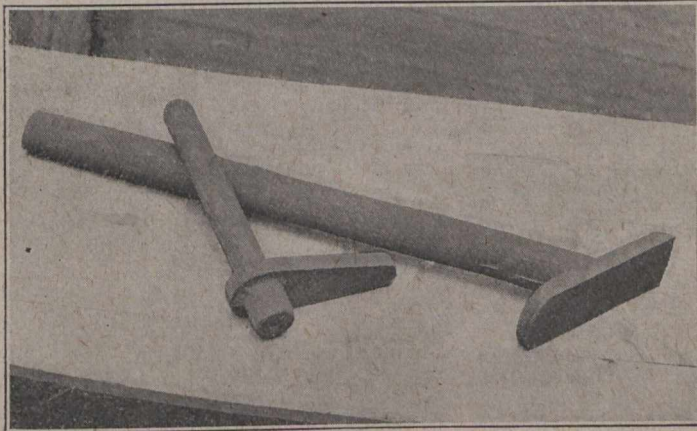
Grate Shaker Shaft and Smokebox Brace Produced on the Forging Machine.
